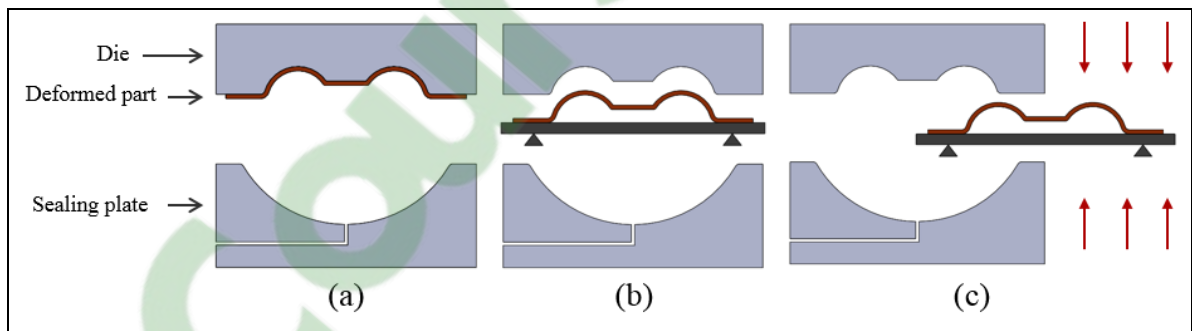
The schematic view of a cooling process, a) Die opening, b) Part loading on carrier, c) Part exiting
